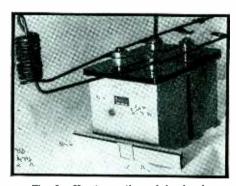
Heating coil used for hardening of interior surfaces of steel tubes
